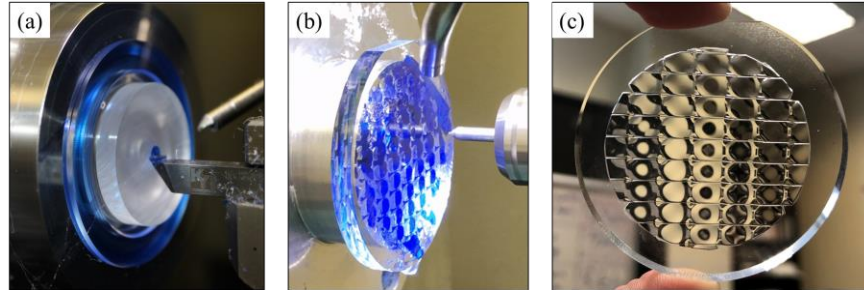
(a) Diamond turning of surface to flat, (b) Diamond milling of the optical surface, (c) Final optic.
